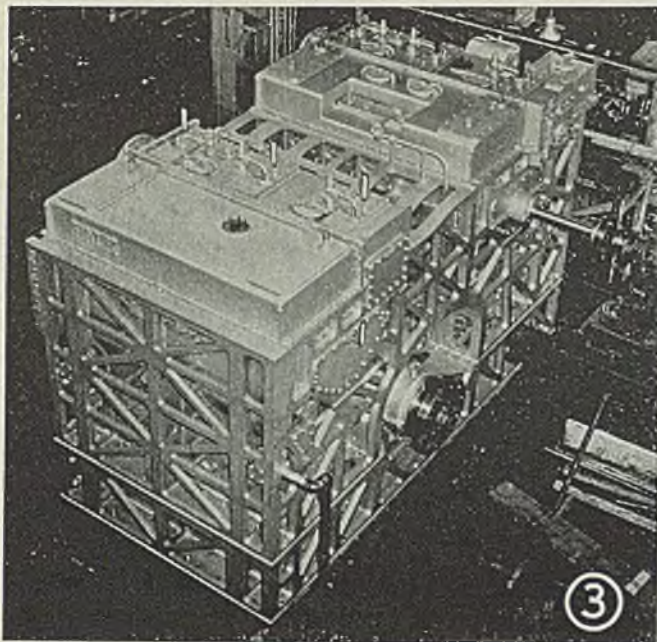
This 30,000-horsepower double-reduction herringbone gear drive for a destroyer transmission is no simple product. Many problems are involved in its making
